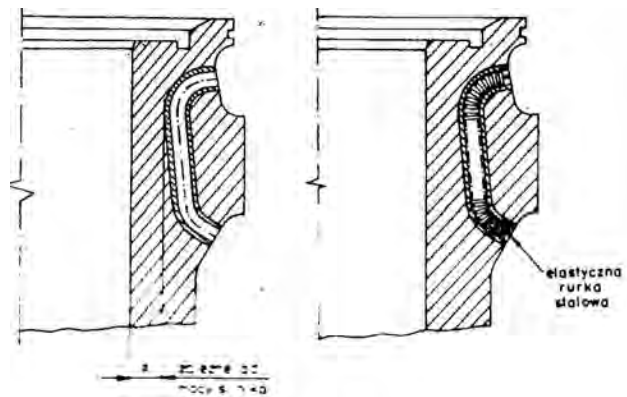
pictures all most important design features in exhaust valve area. Modifications introduced are the following:
